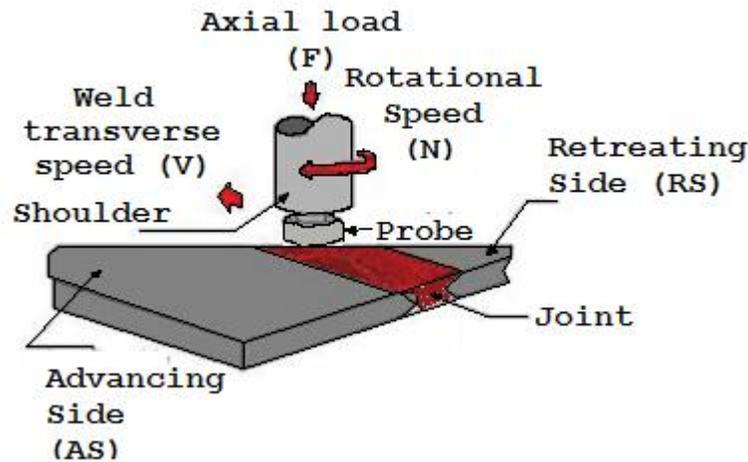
Schematic illustration of Friction Stir Welding.
